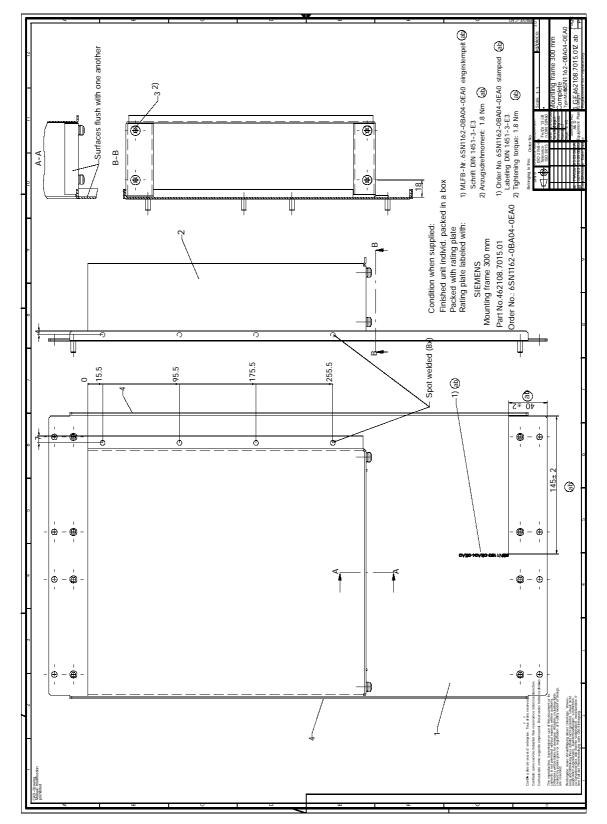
External cooling, mounting frame for cabinet installation module width 300 mm, 6SN1162-0BA04-0EA0
